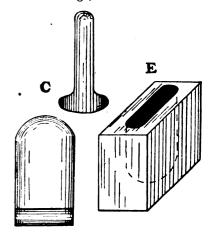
SHOWING VIEWS OF JUMP AND STAMP BLOCK.
